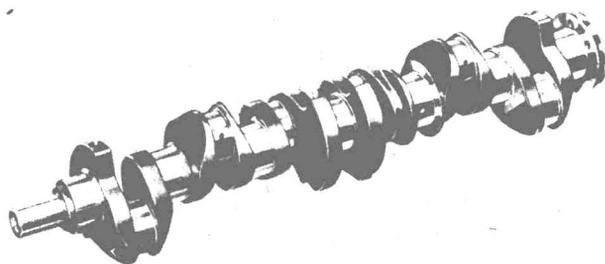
Engine crankshaft. (Ford Motor Company)
